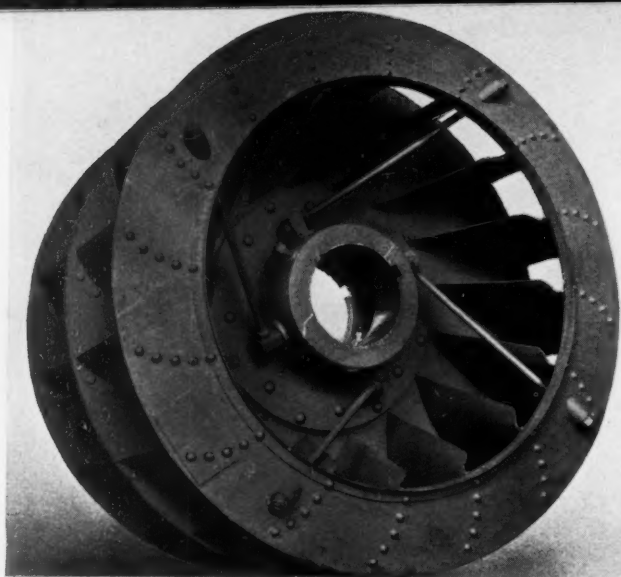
Corrosion is resisted in this fan by nickel steel flanges and centerplate, and stainless rivets
